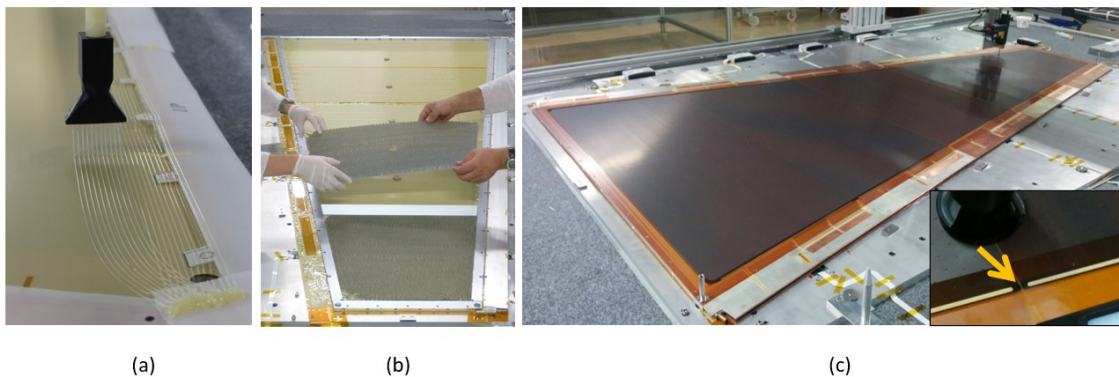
An automatic glue dispenser was installed (a). Honeycomb structures and aluminium bars are placed on the top of glued PCBs before placing another layer of PCBs (b). One assembled SM1 readout panel that has two back-to-back layers of readout PCBs with pillars for the mesh. The inset image indicates the insulation ($>30\text{ G}\Omega$) of the junction glue at the silverline position that has been measured with respect to the HV inputs of both PCBs (c).
